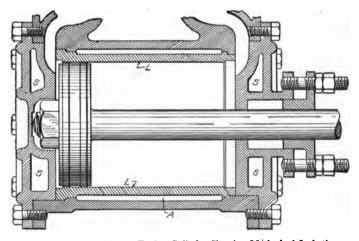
Section of Steam Engine Cylinder Showing Method of Jacketing
